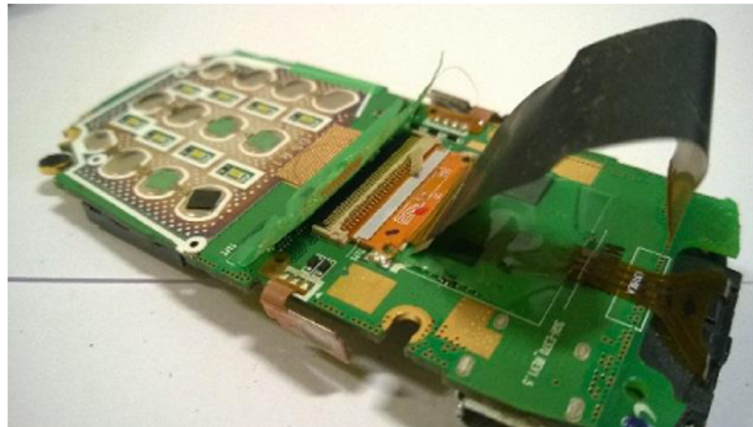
The weakest link in the ease of disassembly of the Samsung E370: the data cable connecting the two parts of the phone was soldered and could not be removed without breaking it
